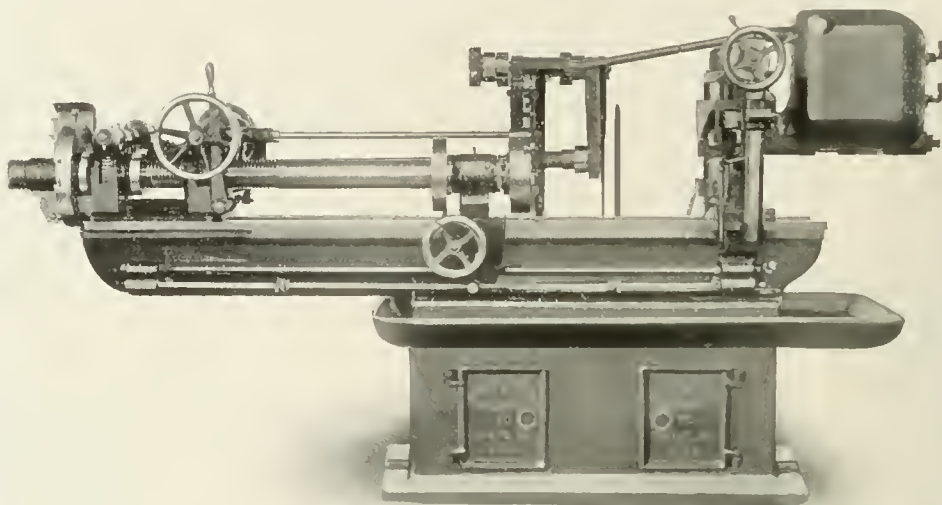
Six- by Forty-eight-inch Automatic Thread Milling Machine
